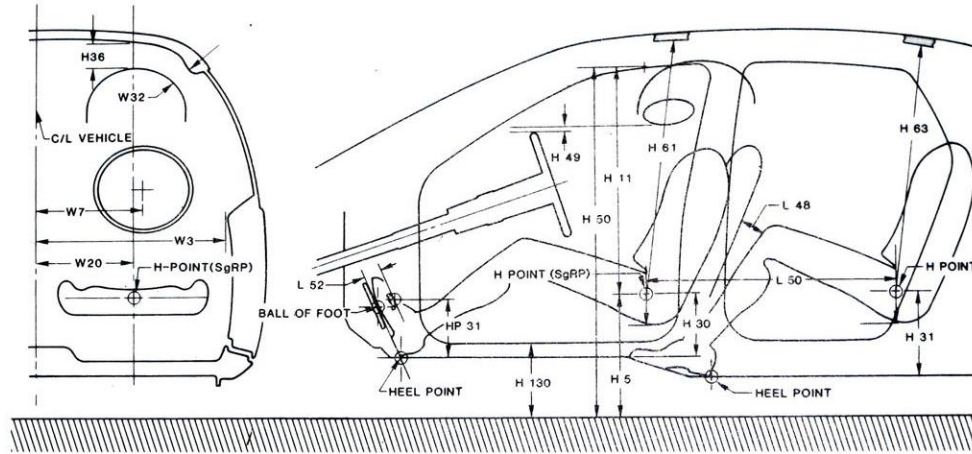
Main interior dimensions for passenger packaging (SAE J1100)
